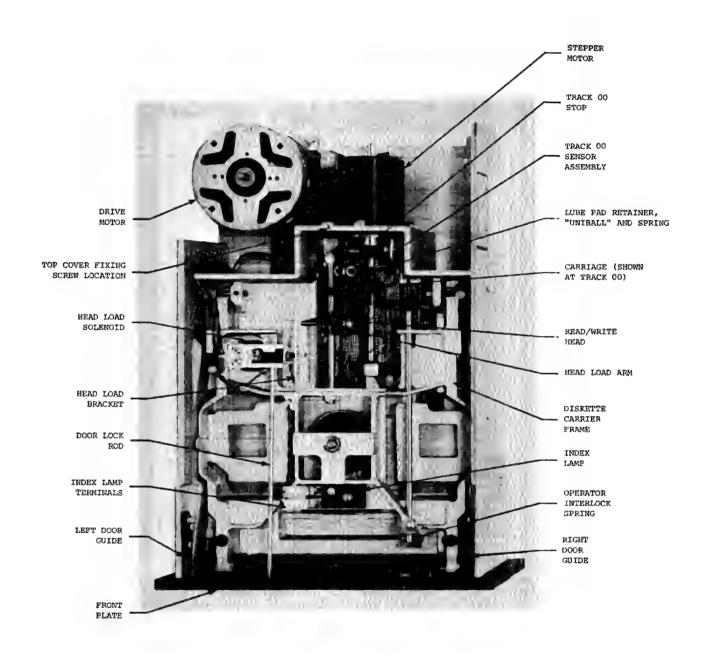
Model 76 Diskette Drive with Top Cover Removed
